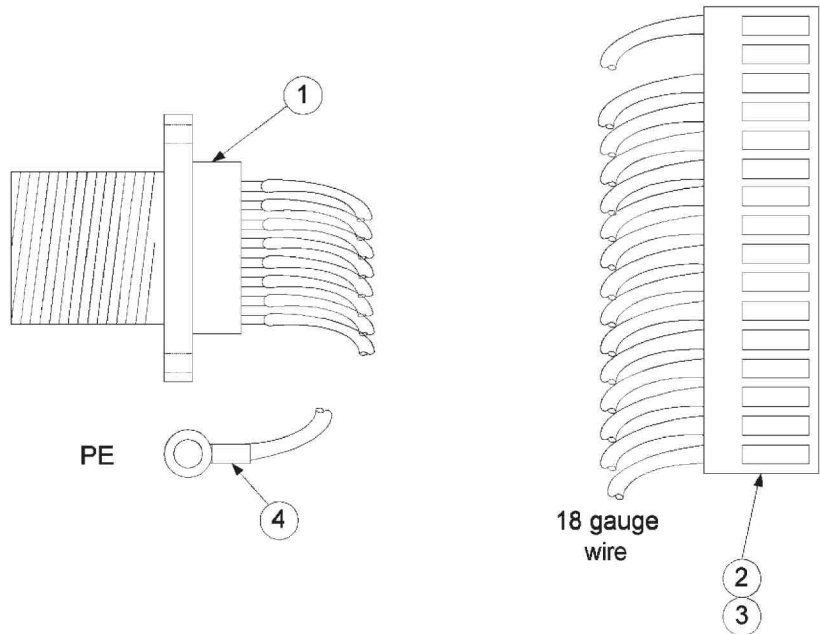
AVC AUX REMOTE INTERFACE CABLE EXPLODED VIEW
